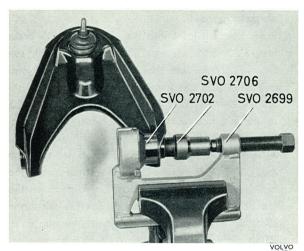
Fitting the first rubber bush, upper wishbone
